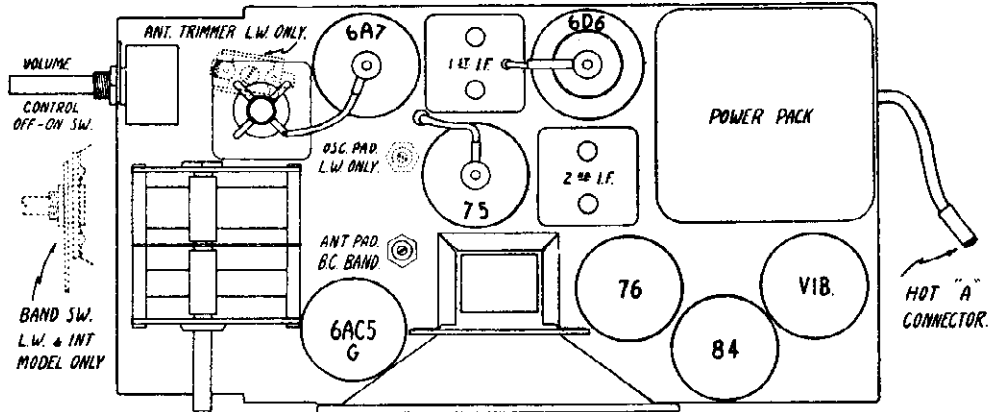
LOCATION OF PARTS ON TOP OF CHASSIS
